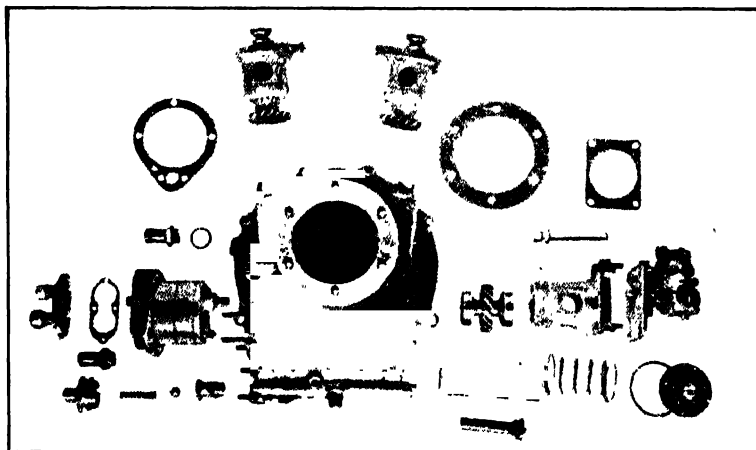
Rear or Accessory Drive Section of Wright J5 Motor Disassembled.
